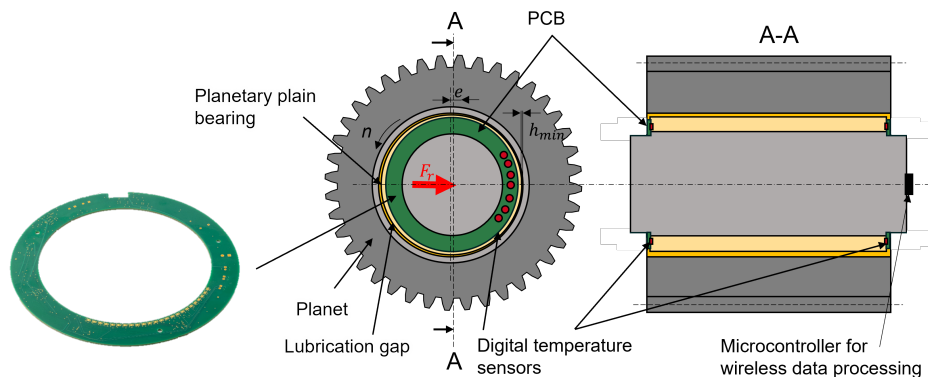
Autarkic TFM-prototype concept for planetary plain bearings in wind turbine gearboxes
